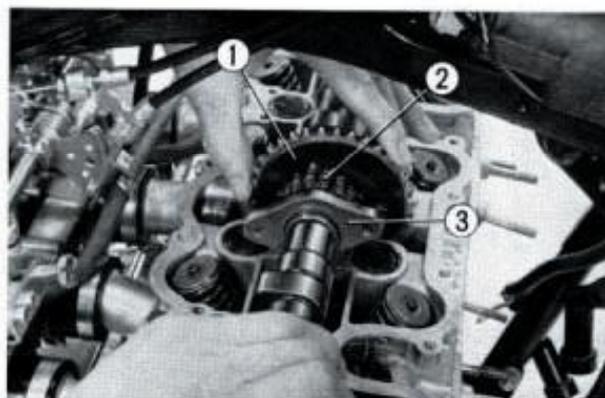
① Cam sprocket ② Cam chain ③ Camshaft
